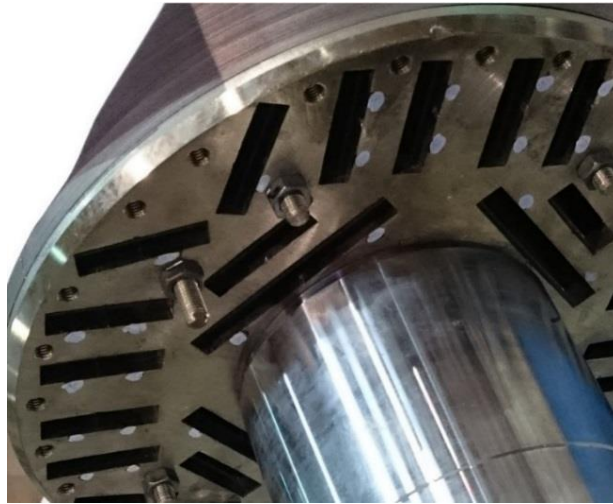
Rotor front endplate prepared with markings to show the magnets places and the magnets polarity in relation to the magnet slots.
